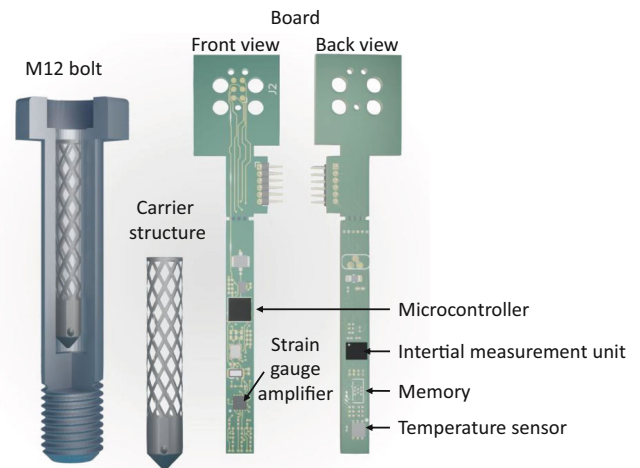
Concept of the prototype of the sensor system of a sensor-integrating bolt
